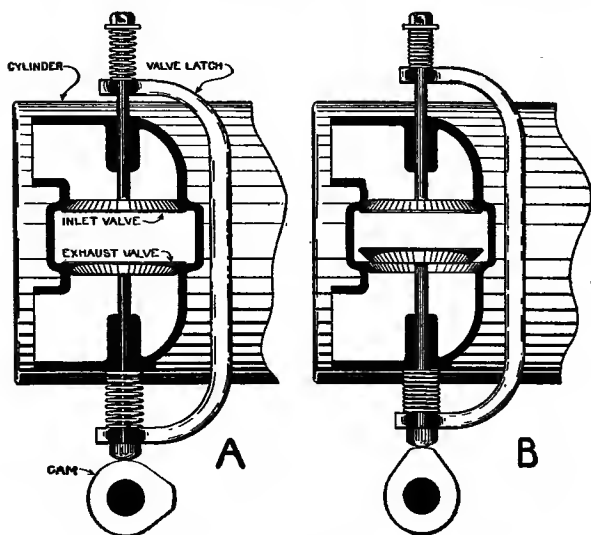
INLET VALVE LOCKED WHEN EXHAUST VALVE IS OPEN.
